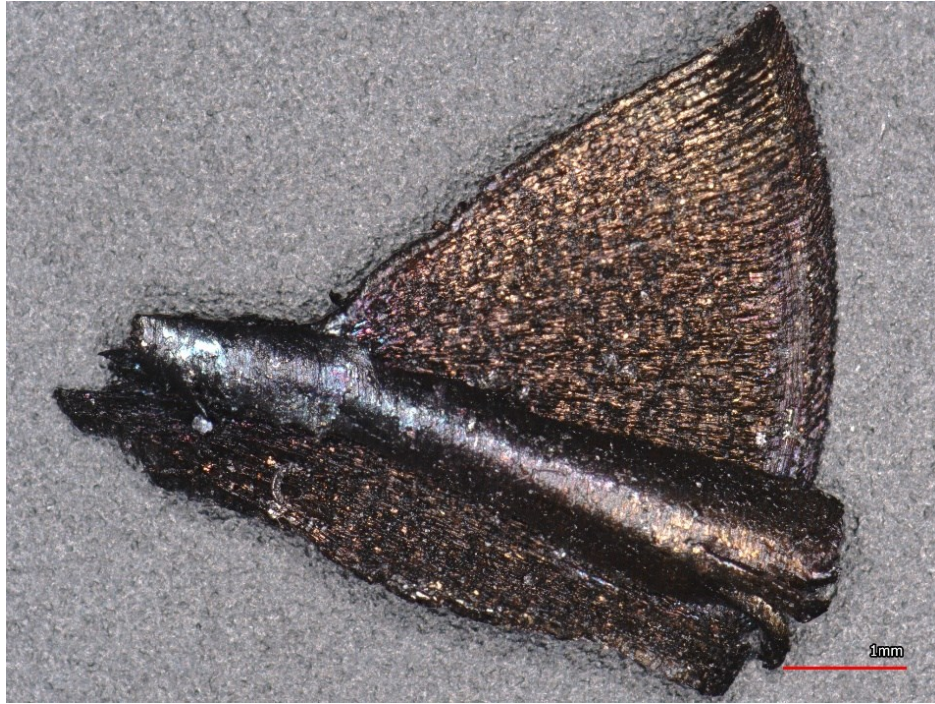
Typical short, segmented chip produced when drilling ADI.
